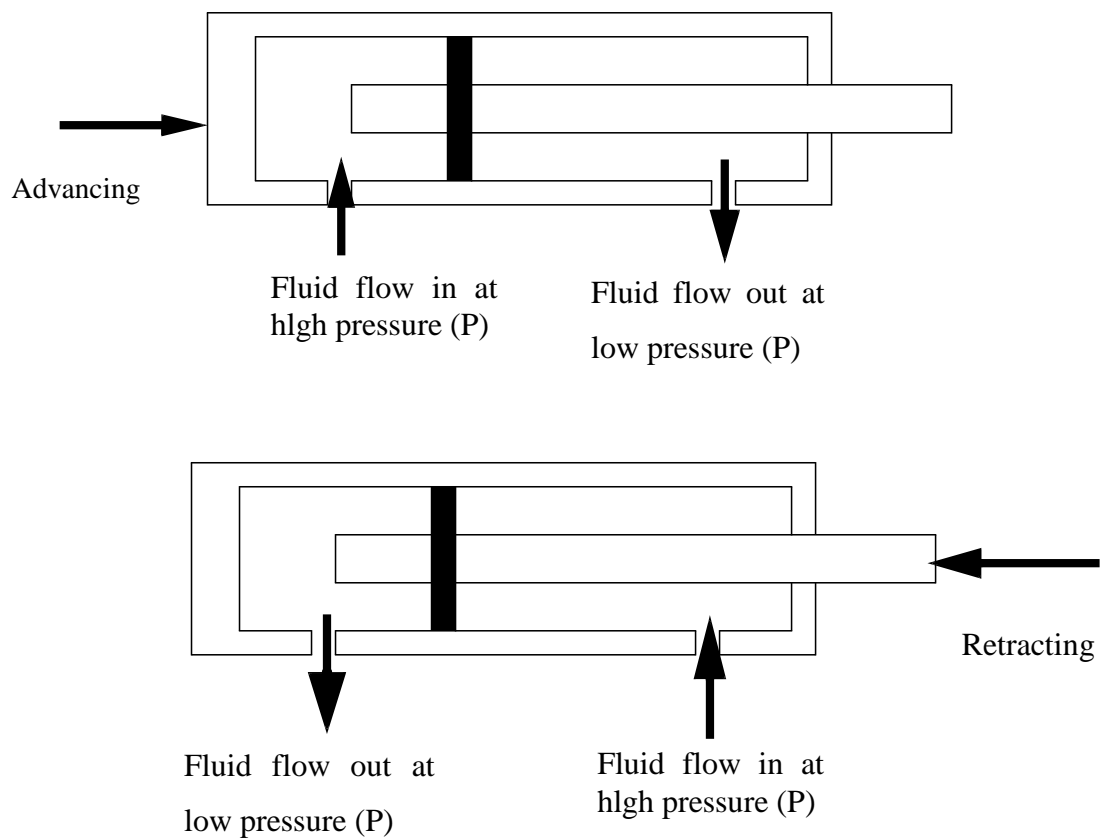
A Cross Section of a Hydraulic Cylinder
